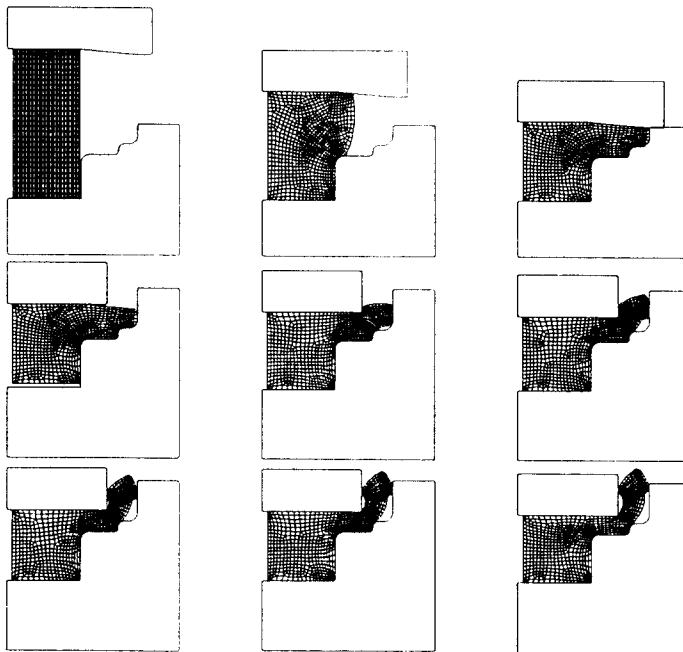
Formation of bending defect in a cold forging process.
